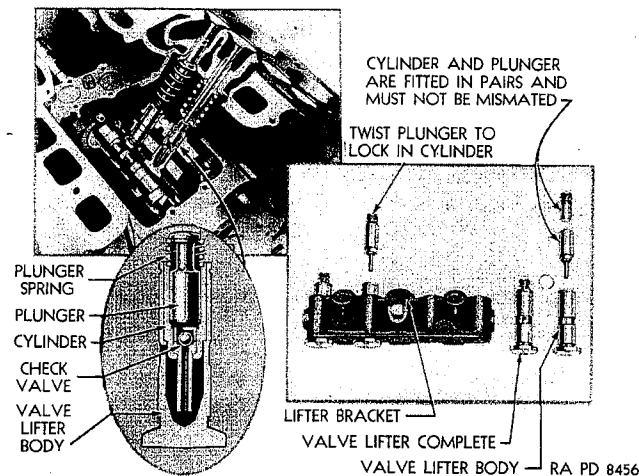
Valve Lifter Bracket Assembly, Disassembled
